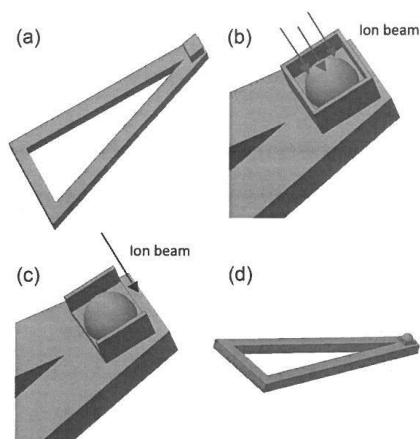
Schematic diagrams showing the FIB machining process: (a) customized particle probe before fabrication, (b) hemispherical geometry fabrication, (c) removal of residual material, (d) SFM cantilever after fabrication.
